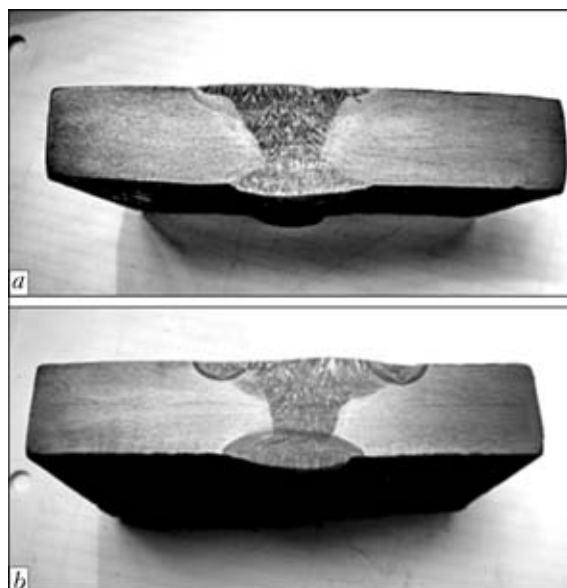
Macrostructures of butt joints produced by submerged-arc welding before (a) and after (b) argon arc treatment
